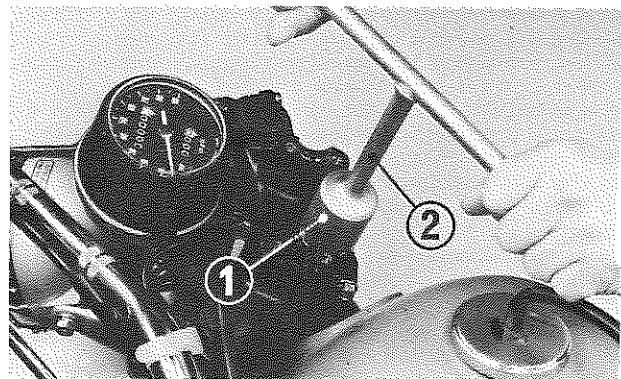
(1) Steering stem nut (2) Steering stem nut wrench
